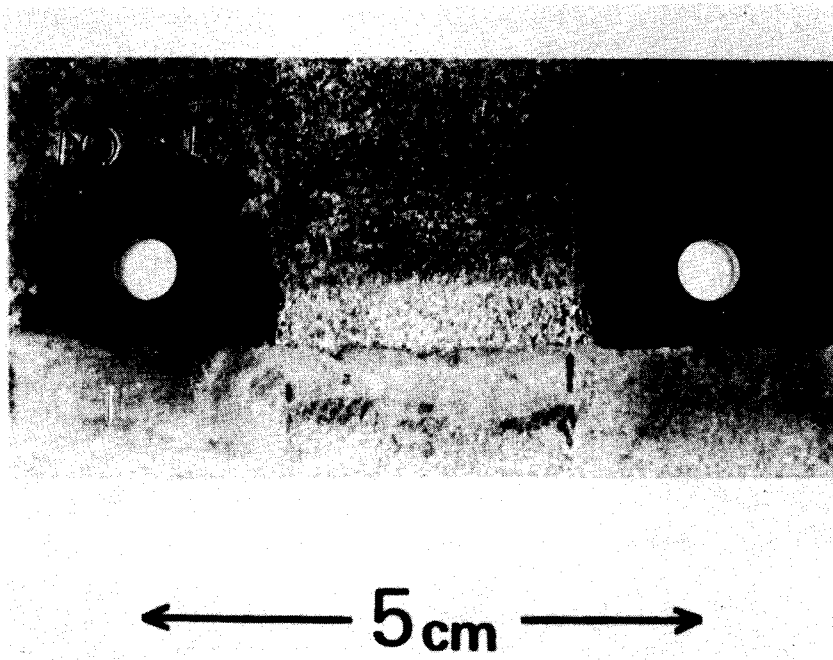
Welded chromium modified 70/30 copper nickel sample showing erosion after 1644 hours exposure to jet impingement.
